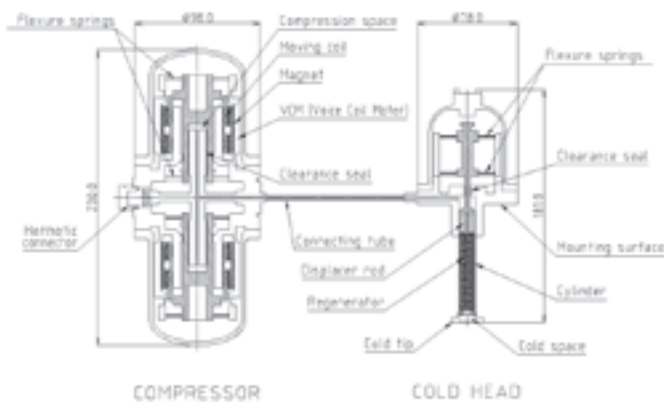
Schematic drawing of single-stage Stirling cryocooler
